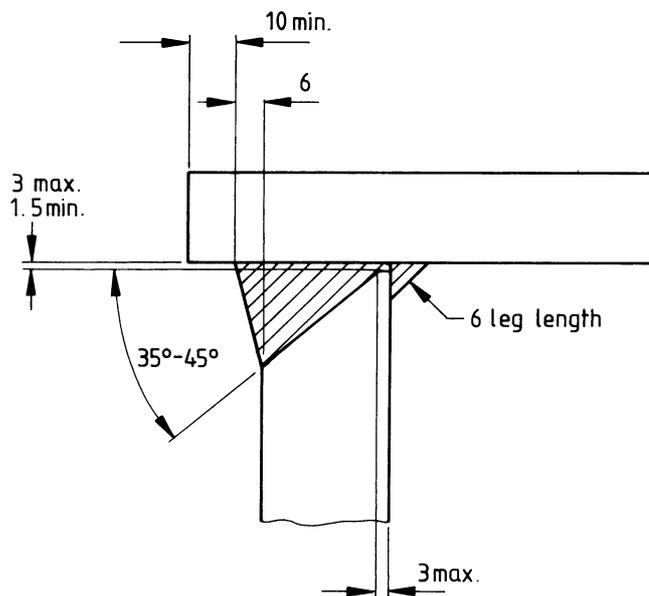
Welding details for compensated openings in flat end plates
